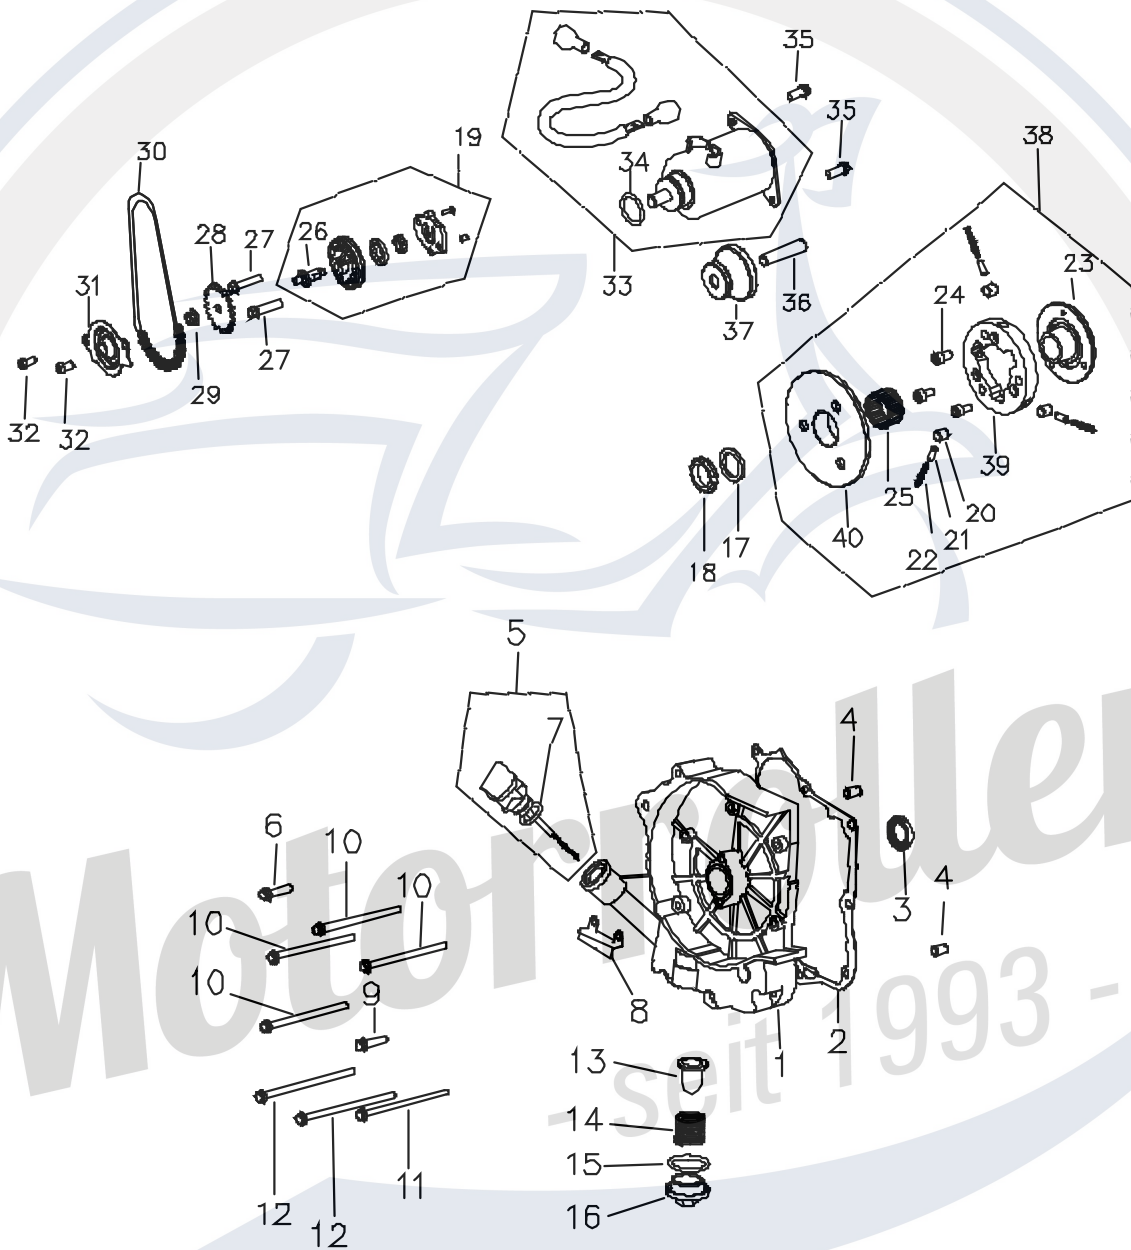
ENGINE RIGHT CRANKCASE COVER
